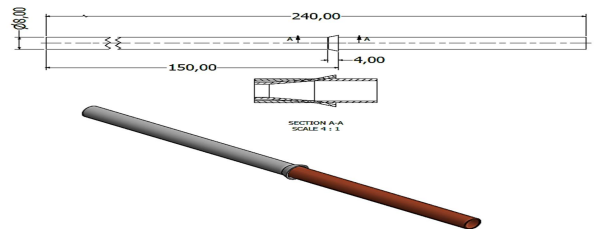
Dimensions of flared aluminum and copper pipe with brazed on the eutectic joint.
